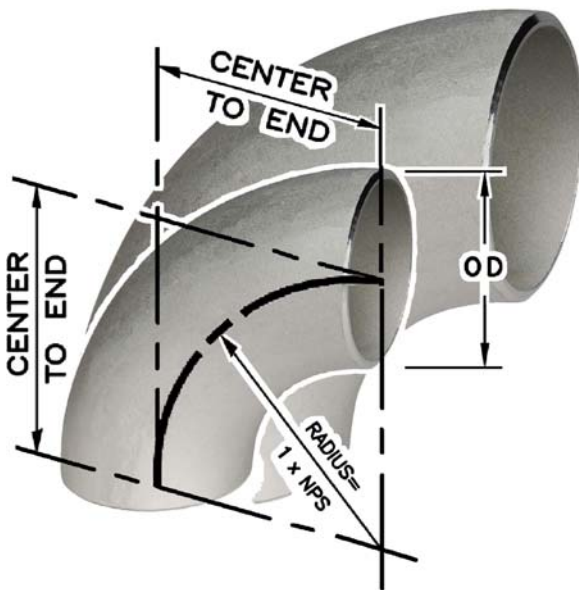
Center-to-end dimension of a 90° short-radius elbow.
